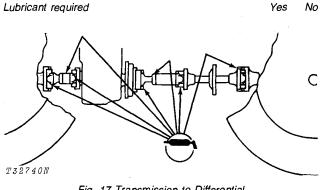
Transmission-to-Differential Drive Lines (7 Points)
